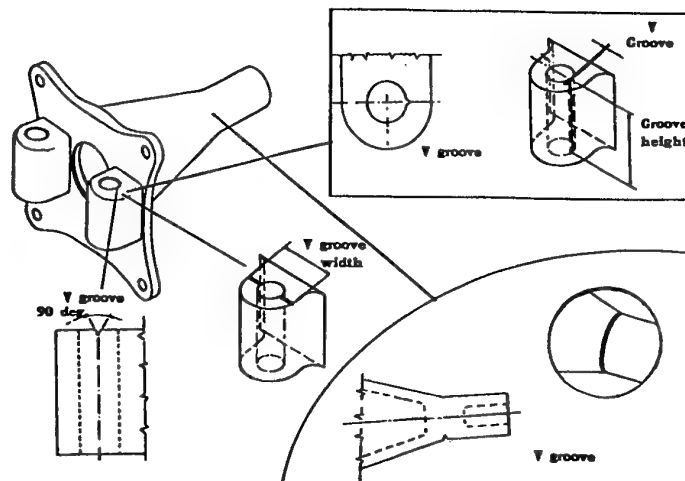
M.R. Hub Support Cone - "V" grooves of flawed components for fatigue tests
